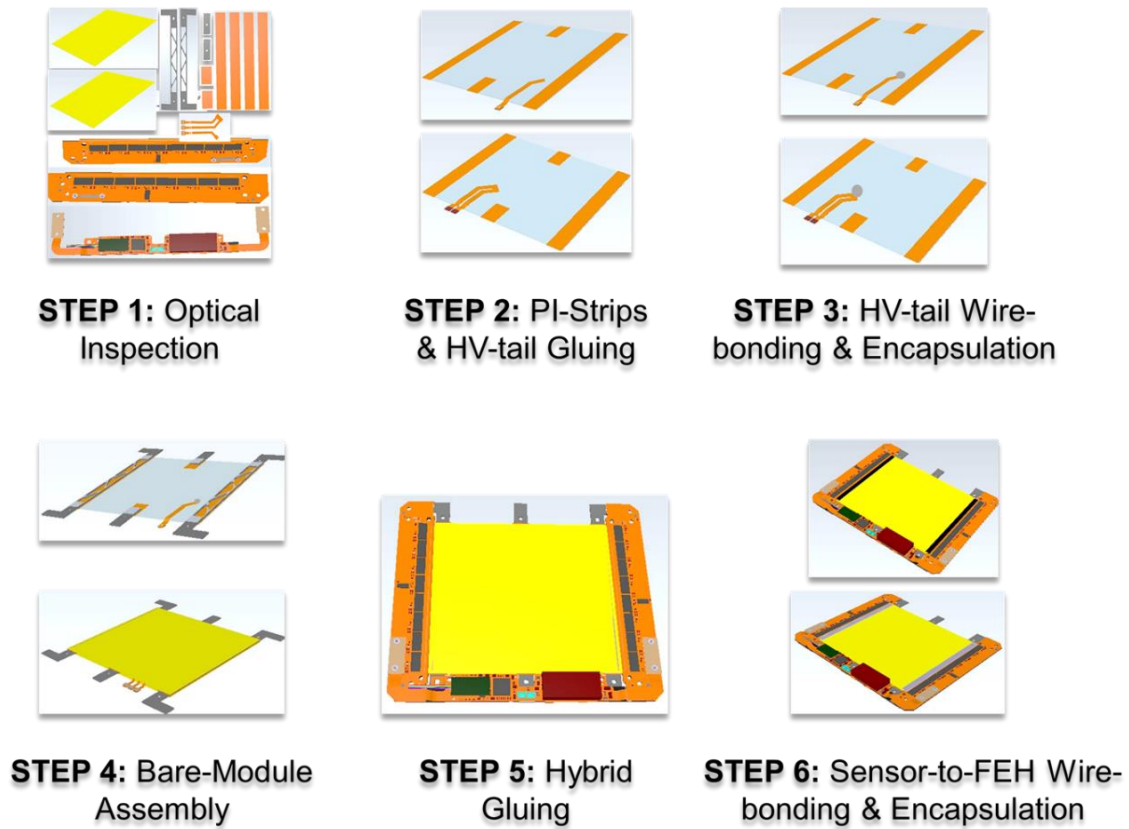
Different steps followed during the module assembly. Step 1: Visual inspection of all the components to check for mechanical damage. Step 2: Gluing of kapton strips and HV-tail on the sensor back-plane. Step 3: Wire-bonding and encapsulation of HV-tail to ensure secure connections. Step 4: Assembly of the bare module by gluing the sensors together and utilizing AlCF spacers. Step 5: Attachment of hybrids (FEH and SEH) through adhesive. Step 6: Placement of wire-bonds between sensor strip AC-pads and FEH bond-pads, followed by encapsulation for protection.
